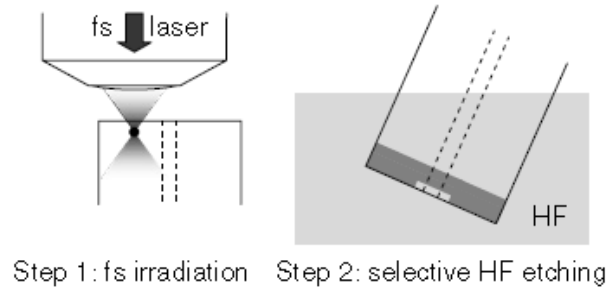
Fabrication procedure of fibre-top cantilever by fs-laser machining and HF etching ([2.48]).
